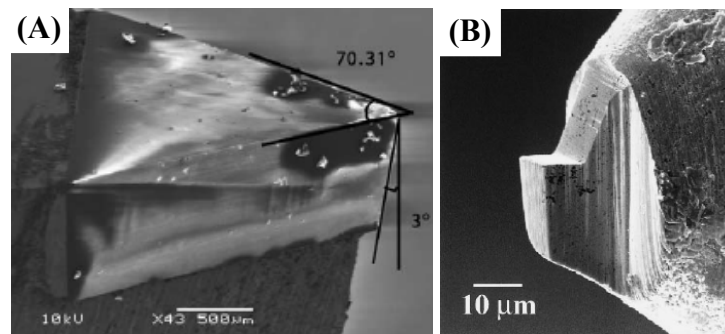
A micro-scale shaping tool with a v-shaped rake face (A) [19] and a rectangular shaped rake face (B) [20]
